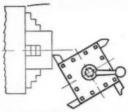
^{\prime\prime}$ square bit mounted in Model $4\frac{1}{2}$ -Sturret used to face work. Same tool is indexed to position and used for turning as shown below.
